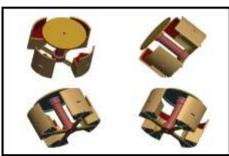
Assembly of Rounded Movable Seating Arrangements in different View
